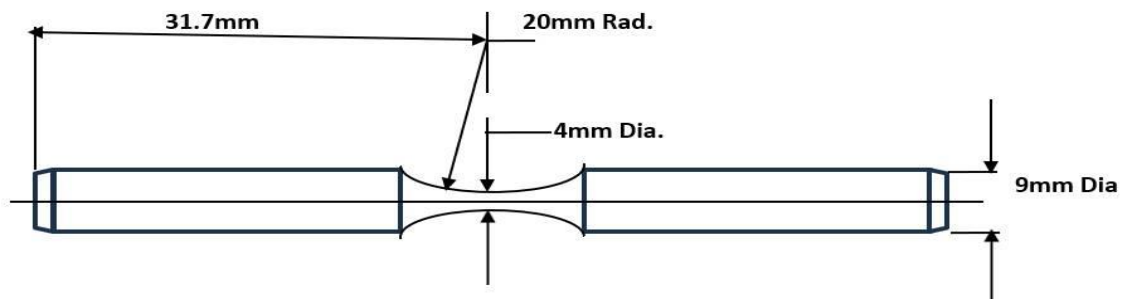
Drawing and dimension of the Fatigue Test Specimen used for this research
